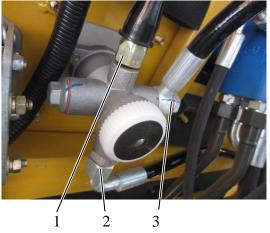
1 Brake taillight pressure switch 2 Foot brake valve air inlet hose 3 Foot brake valve air outlet hose 6. Connect air inlet and outlet hoses of right foot brake valve assembly, connect brake taillight pressure switch.
